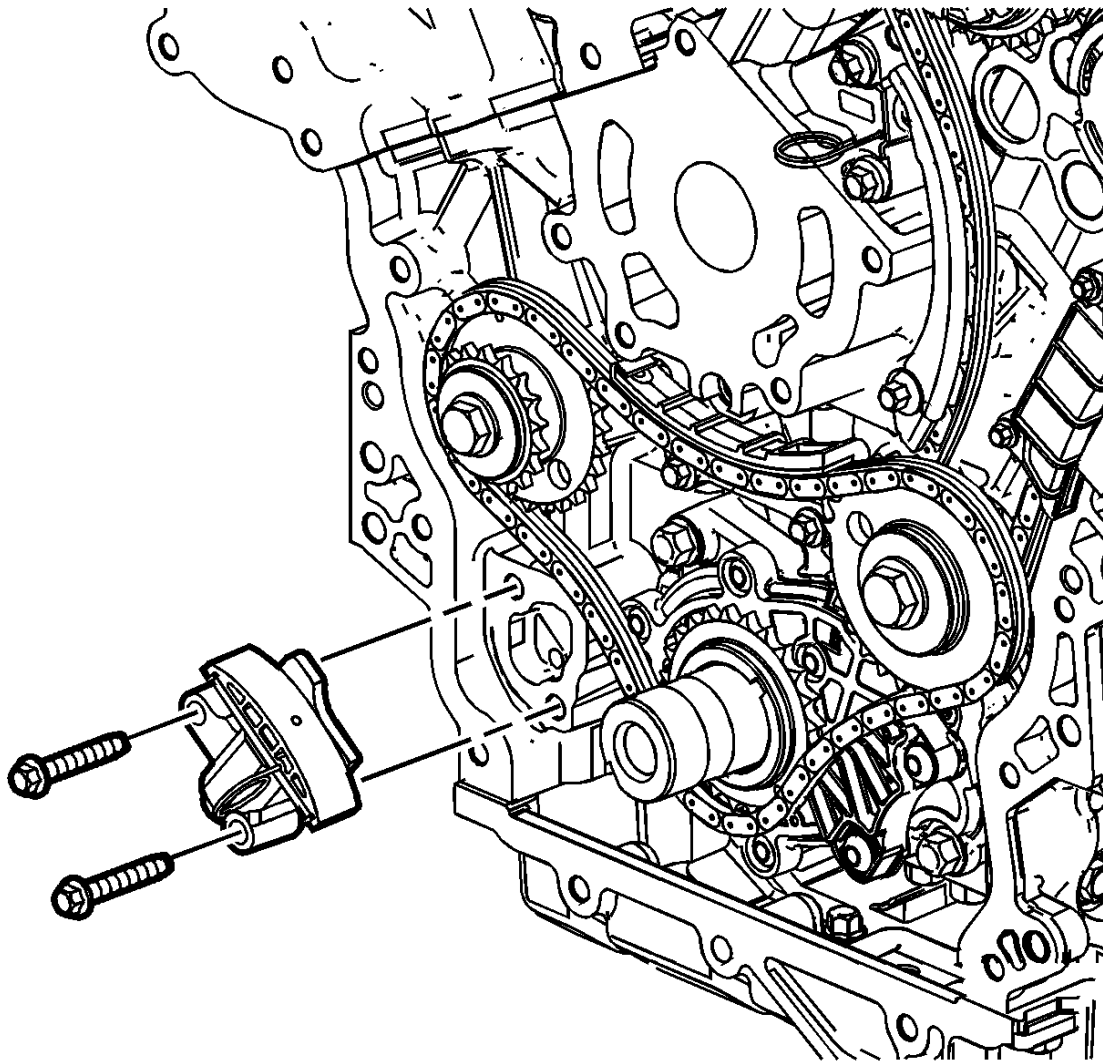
View Of Primary Camshaft Drive Chain Tensioner
